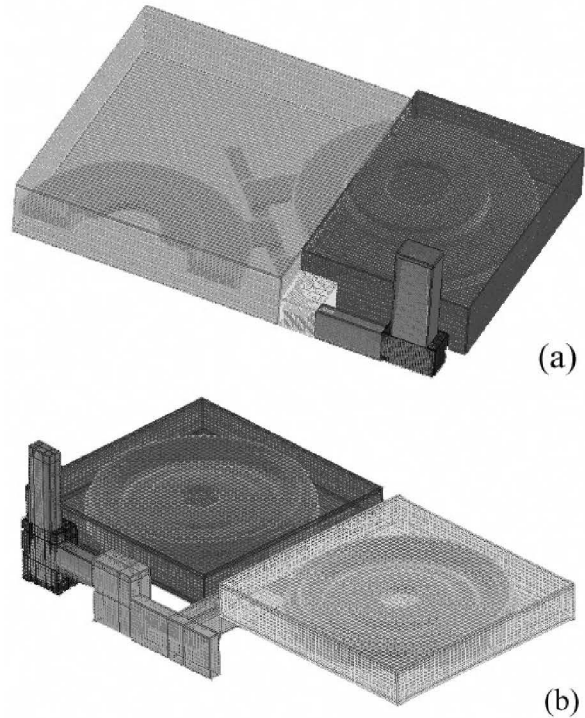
The multi-block meshes of the castings: (a) brake disc and (b) flywheel. Note that the mould mesh is not shown.
